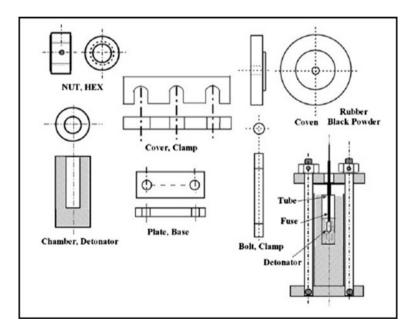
The sand test assembly. US department of Defense (1962) Military standard Explosive: Sampling, inspection and testing. MIL-STD-650 [212]
